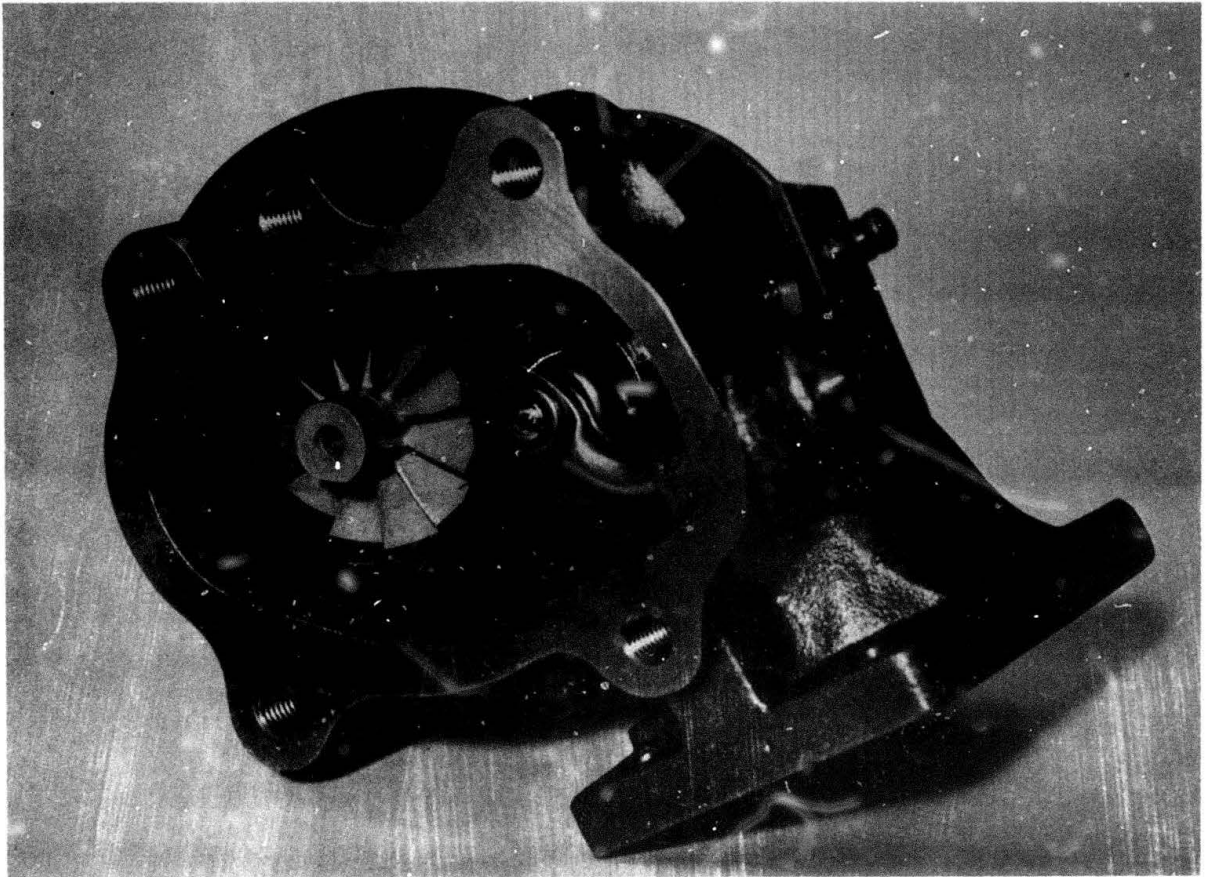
Ceramic Rotor in Turbocharger Test Housing.
